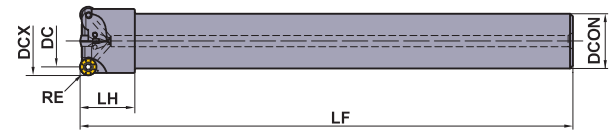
(Non-center Cutting Edge Type (Multi-tooth))
